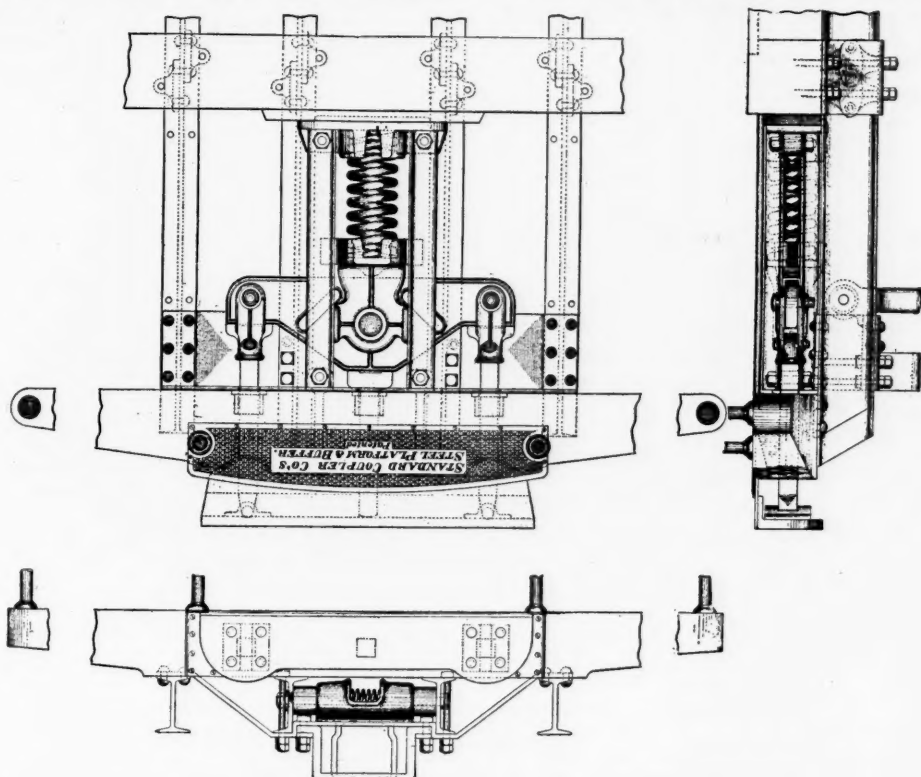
Plan, Elevation and Section of Buffer Mechanism, Standard Steel Platform.
